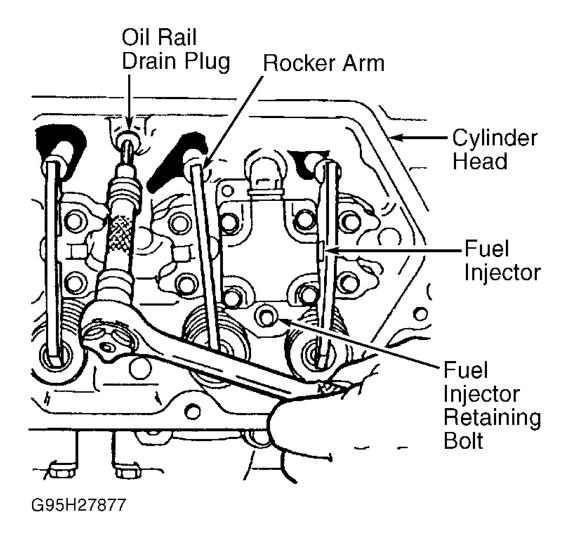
Locating Oil Rail Drain Plug & Fuel Injector Retaining Bolt Courtesy of FORD MOTOR CO.
